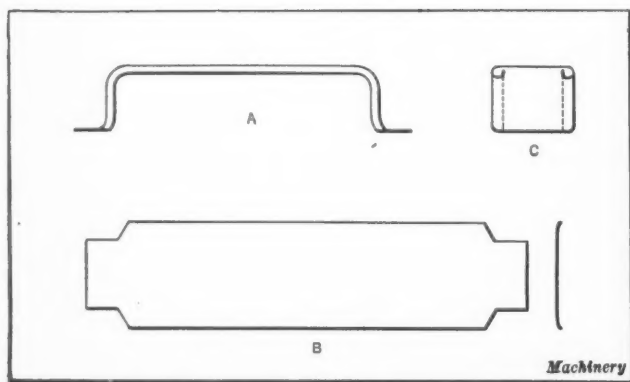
(A) Sheet-metal Handle formed on Press Dies; (B) Blank as it appears before being formed
